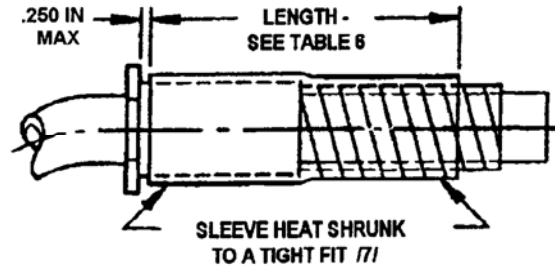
ABRASION SLEEVE ATTACHMENT
